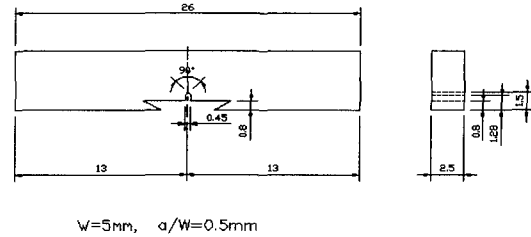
Dimension of the sub-sized specimen for fracture toughness test
